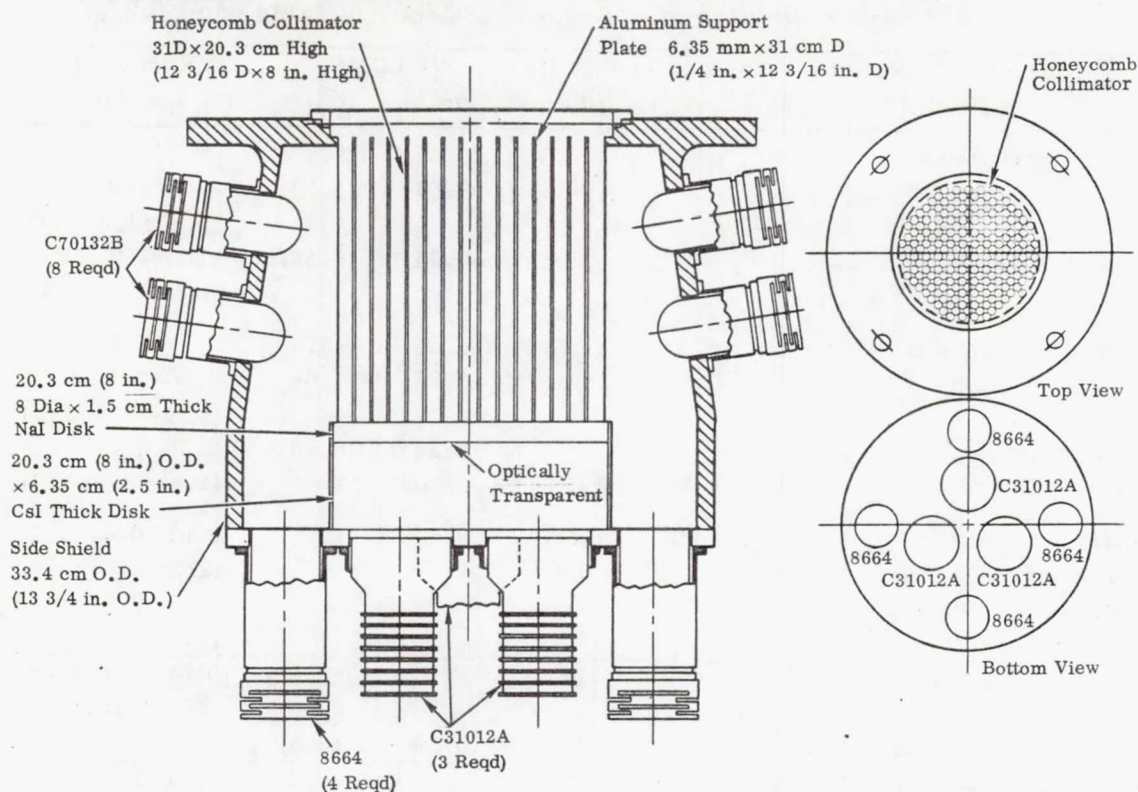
Cross-section of a Single Detector Unit Showing the Crystals, PM Tubes and Mounting Bracket
